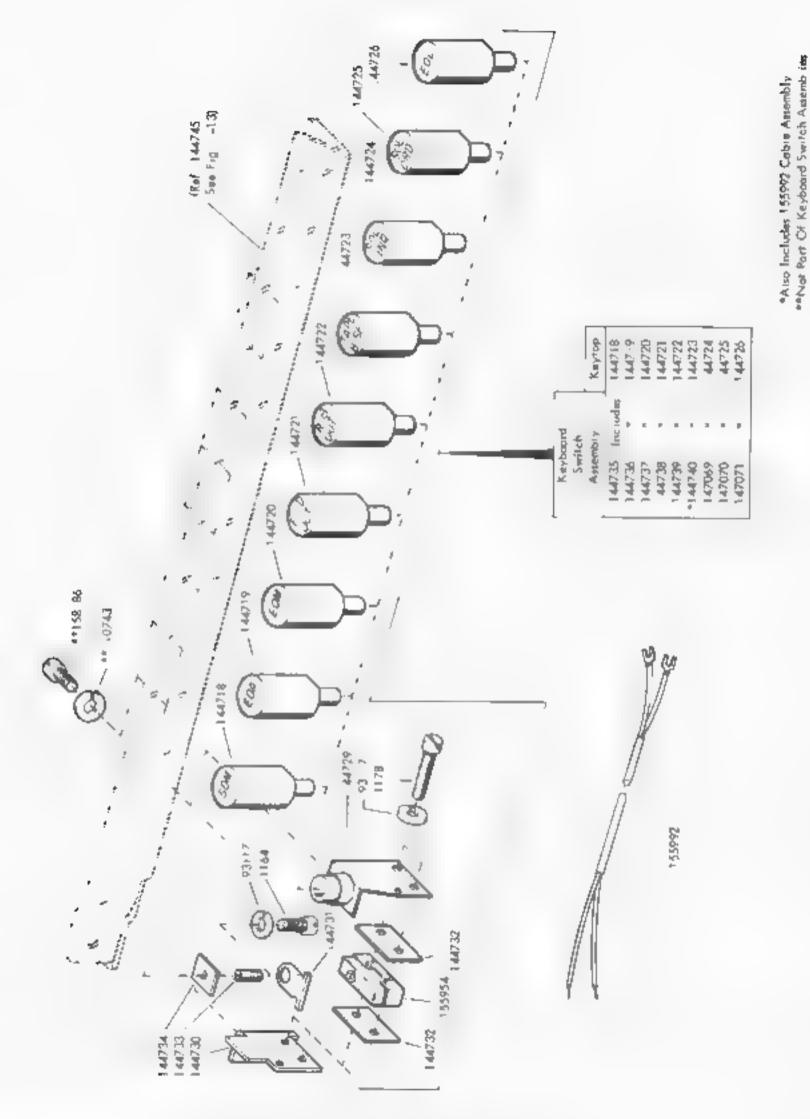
KEYBOARD SWITCH ASSEMBLIES
